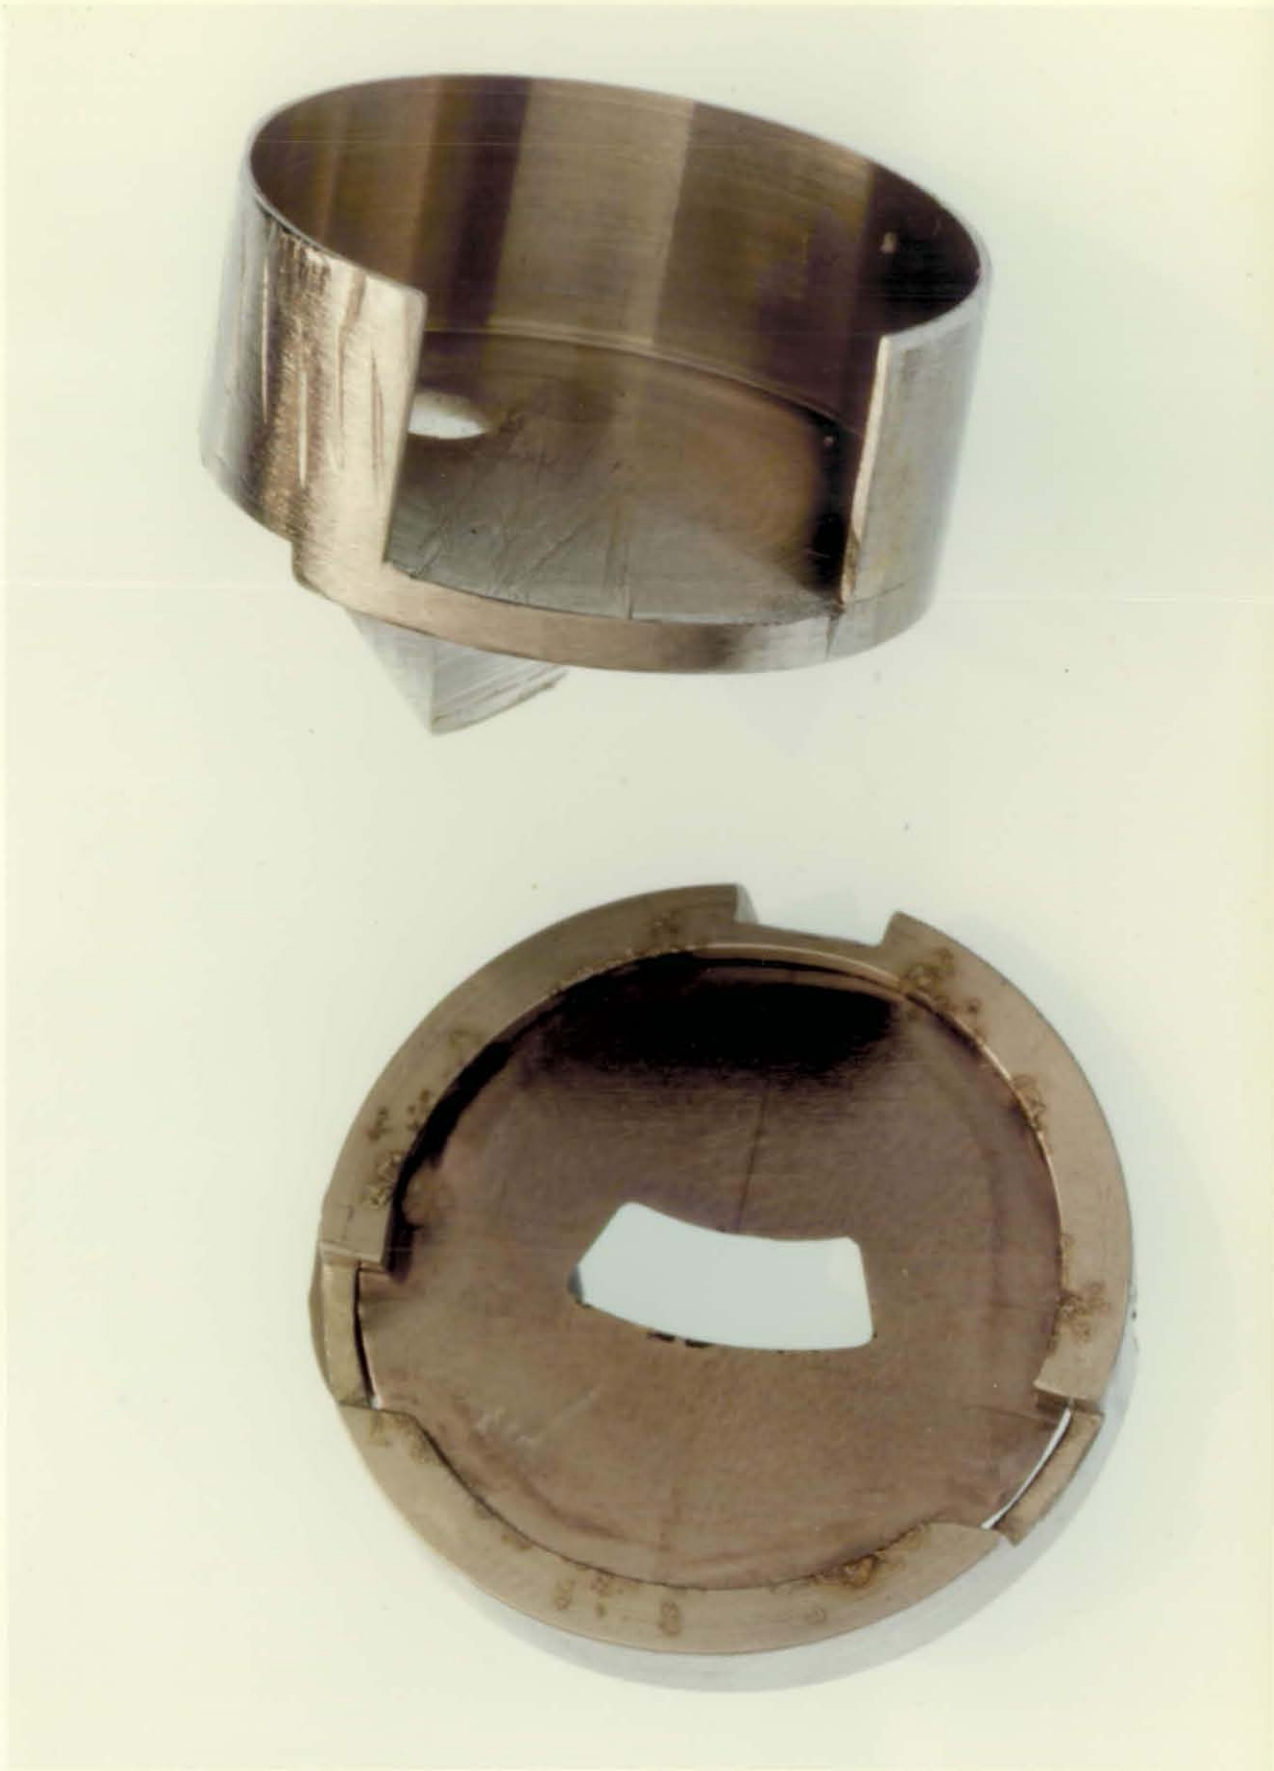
Magnified view of detector holder (O.D. = 20.4 mm) and collimator assembly used in backscattering analysis.
